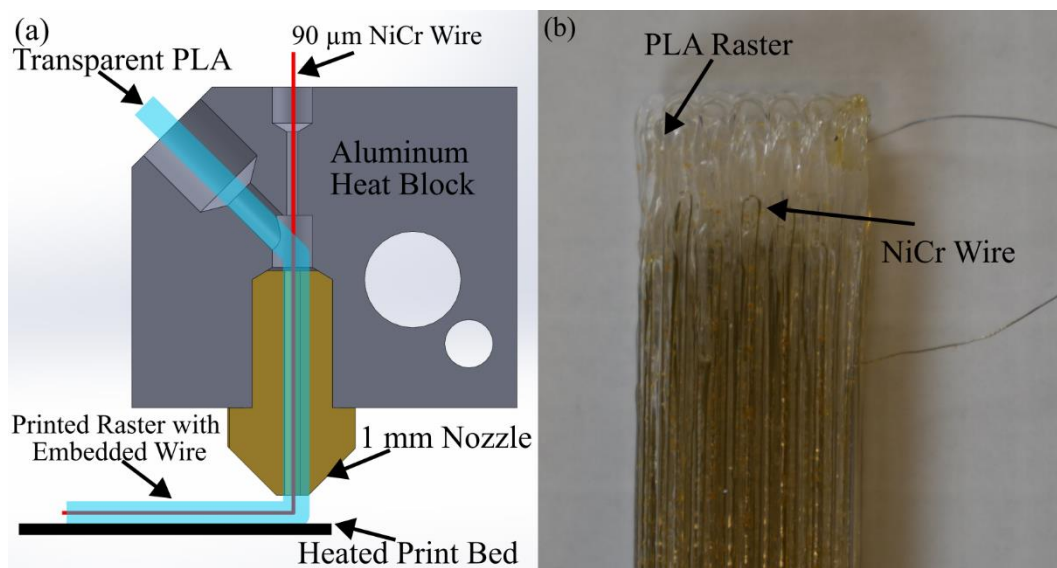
(a) Modified print head design for co-extrusion of continuous wire and polymer raster and (b) sample with visible wires printed unidirectionally embedded in polymer rasters
